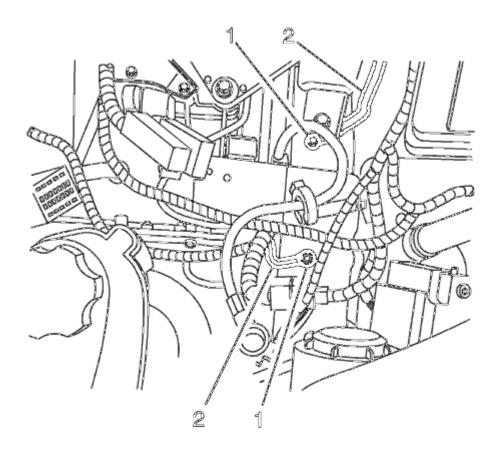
Electrical Vacuum Pump Courtesy of GENERAL MOTORS COMPANY
